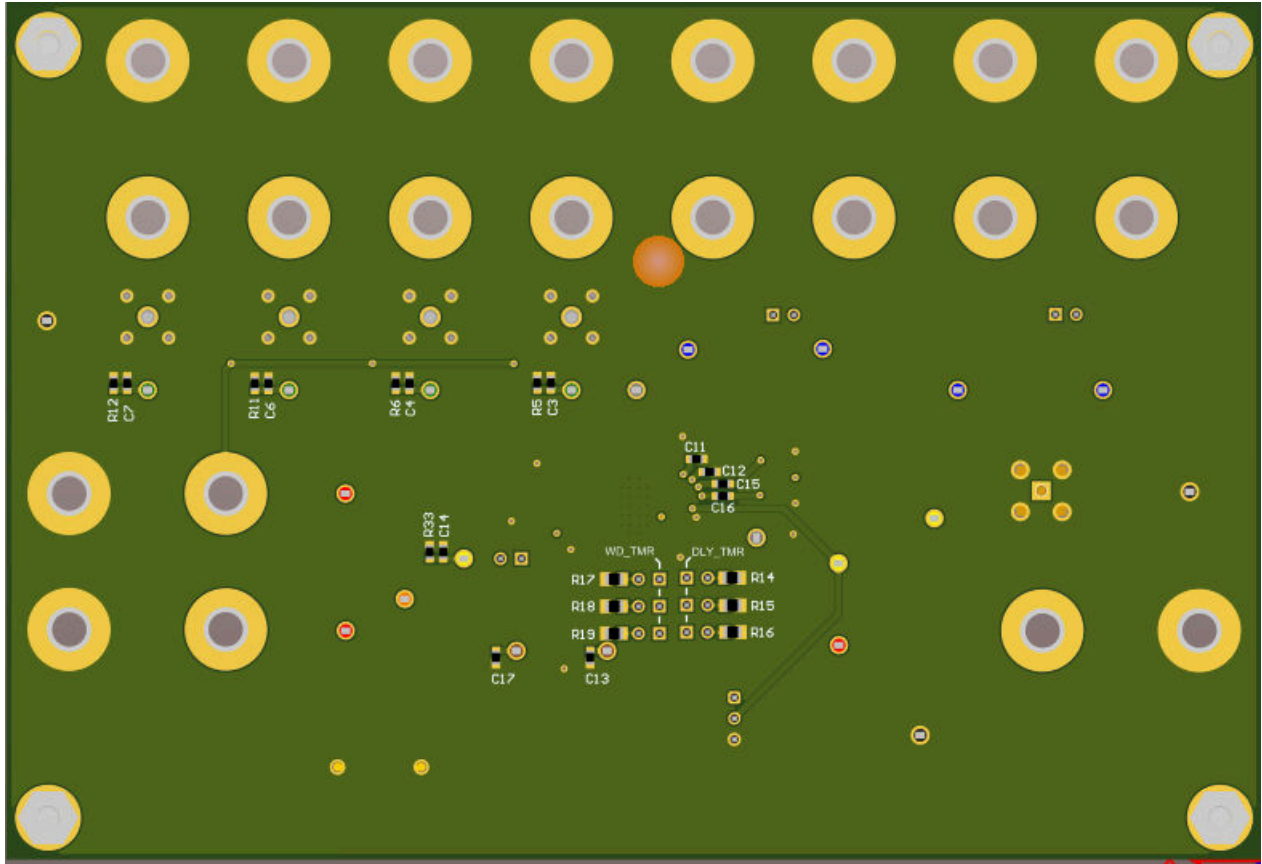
Printed Circuit Board Layout Example: Bottom Layer 3D View
